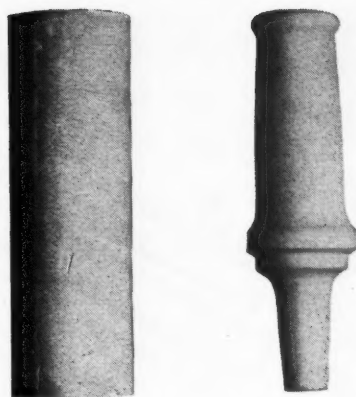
An example of a blank before and after machining (see Fig. 12)
